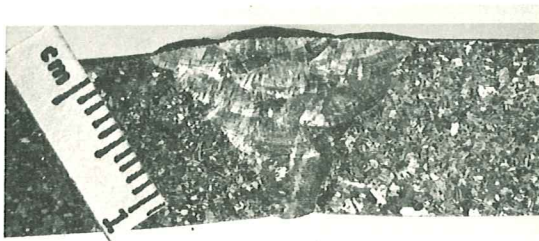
Cross-section of the 800HT/556/800HT weldment.
